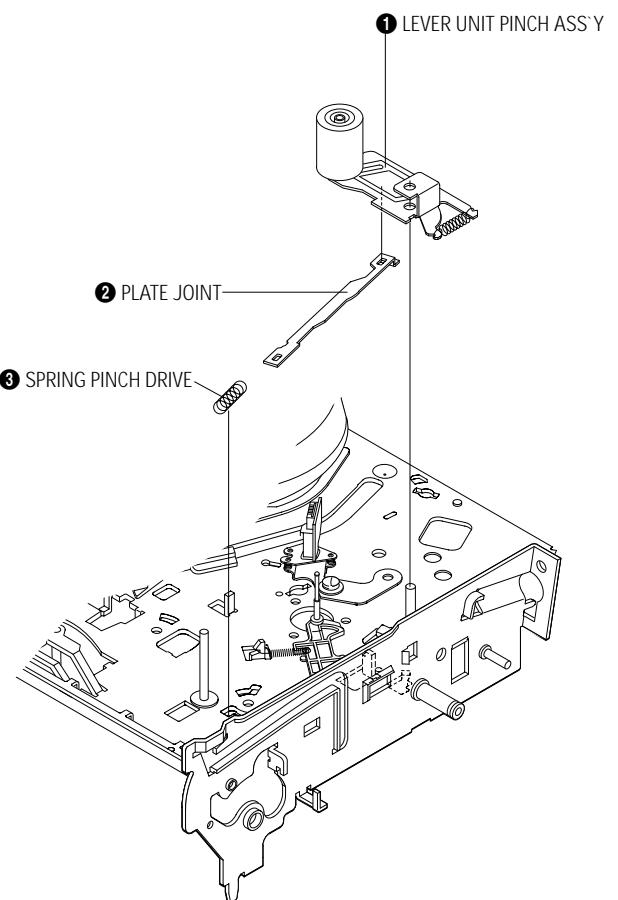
Lever Unit Pinch Ass'y, Plate Joint, Spring Pinch Drive Removal
